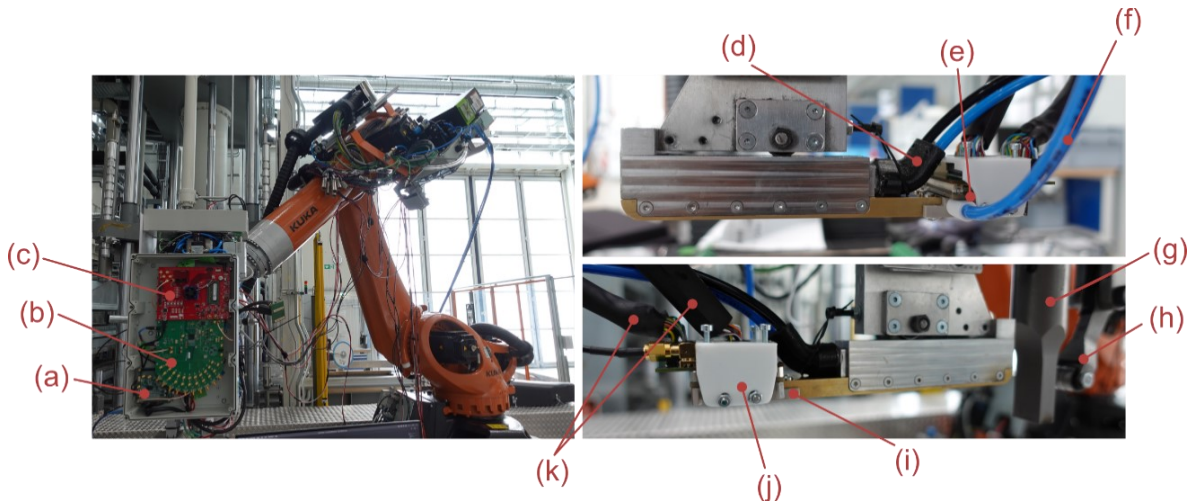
Sensor setup during the welding experiments. Transmit and receive electronics are attached to the welding robot and CMUT is dragged behind the heatsink on a PEEK block. A tube is connected to the PEEK block to be able to press glycerin into a cavity on the underside of the block.
